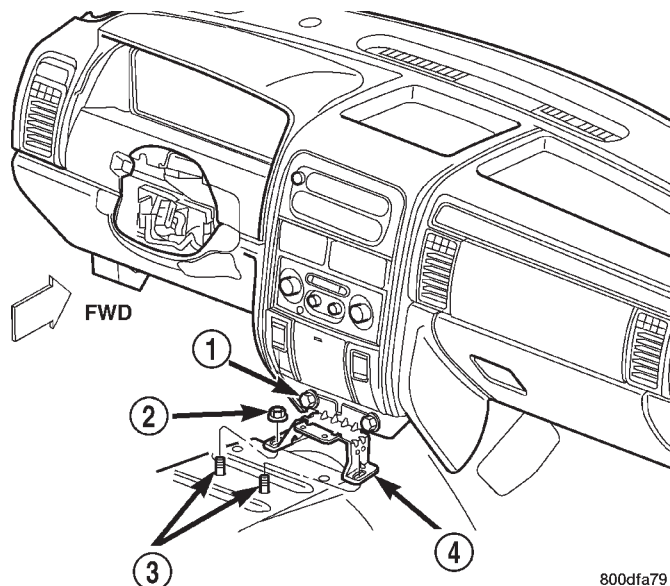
Instrument Panel Center Floor Tunnel Bracket Remove/Install
